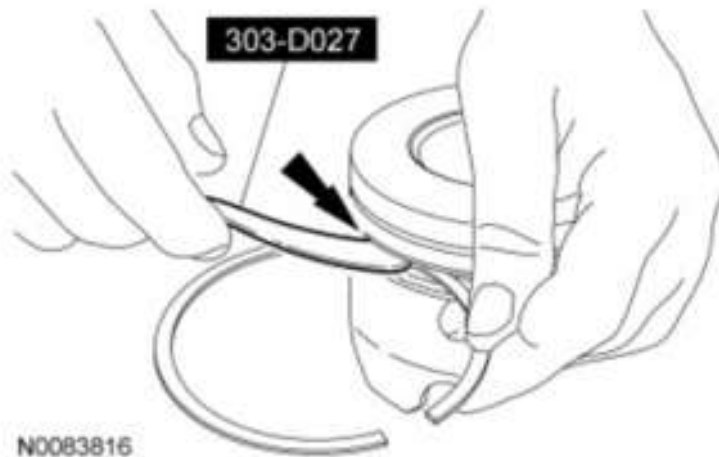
Checking Side Clearance Of Intermediate Ring Groove
